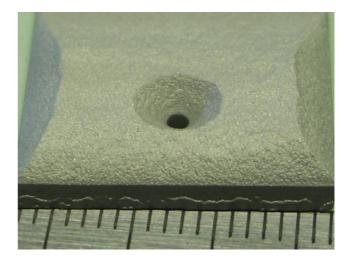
Aluminum coating at the steel substrate with the hole. Coating forms crater at the hole.
